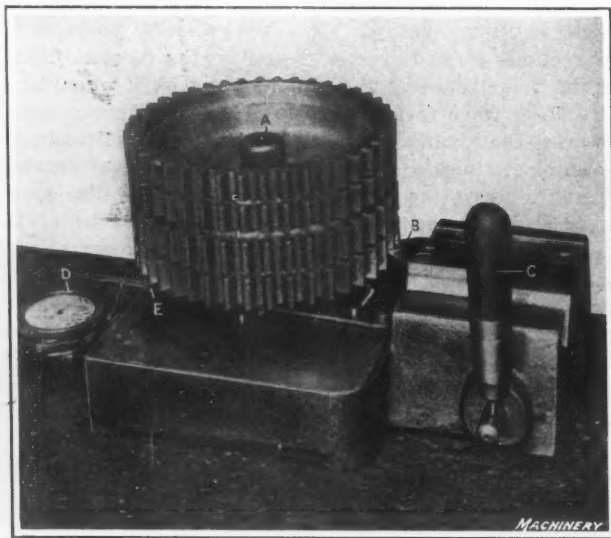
Fixture for testing the Concentricity of the Pitch Circle, the Tooth Thickness, and the Pitch Diameter of Camshaft Sprockets
